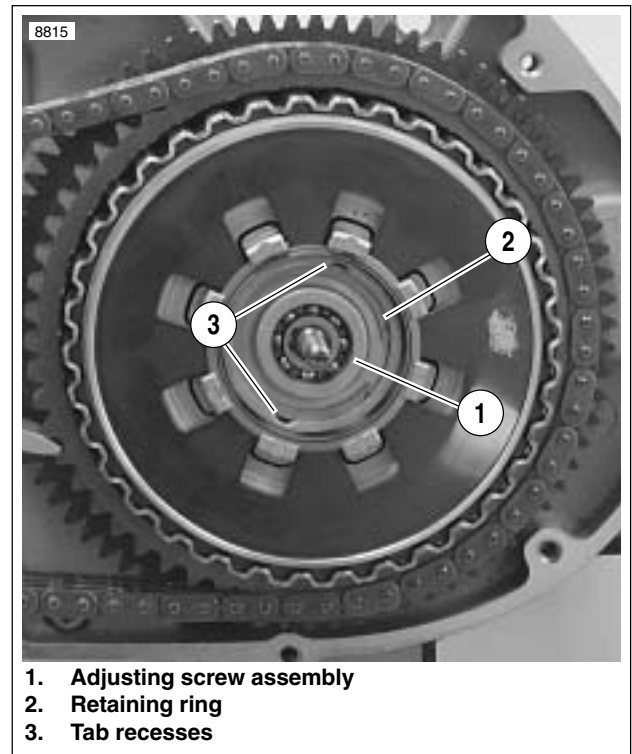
Clutch Adjusting Screw Assembly and Retaining Ring
